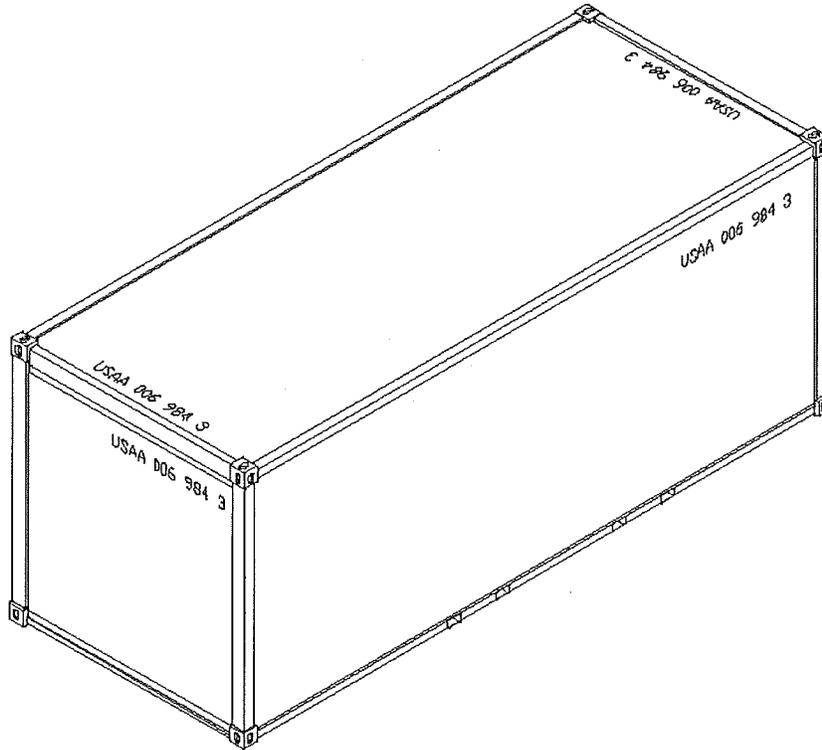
B -TYPICAL HORIZONTAL LAYOUT OF ISO IDENTIFICATION MARKINGS
